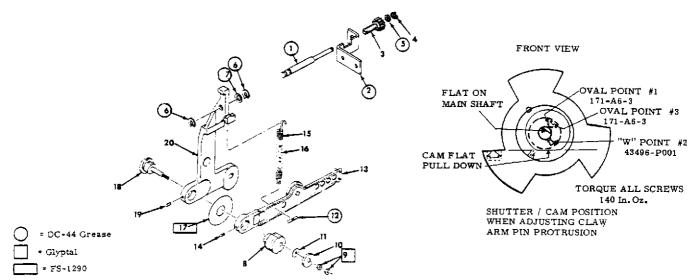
, REMOVAL AND REASSEMBLY OF CLAW ARM
